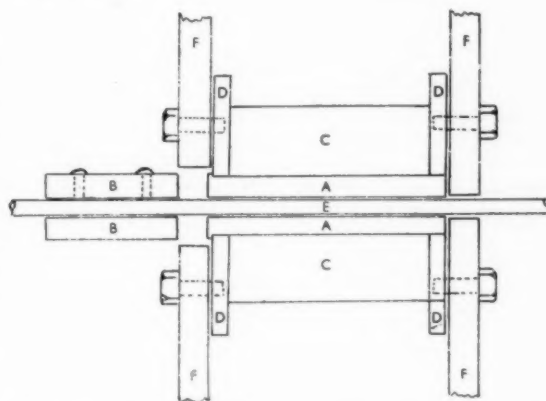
Loading unit of fluctuating-stress creep-testing equipment.
